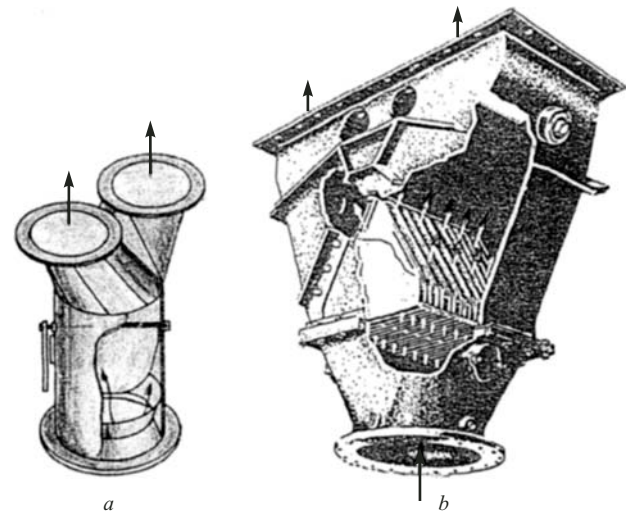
Comparative dimensions of the diffuser-nozzle dust separator (a) and a laminar separator with two outlets from the EVT firm (b).
